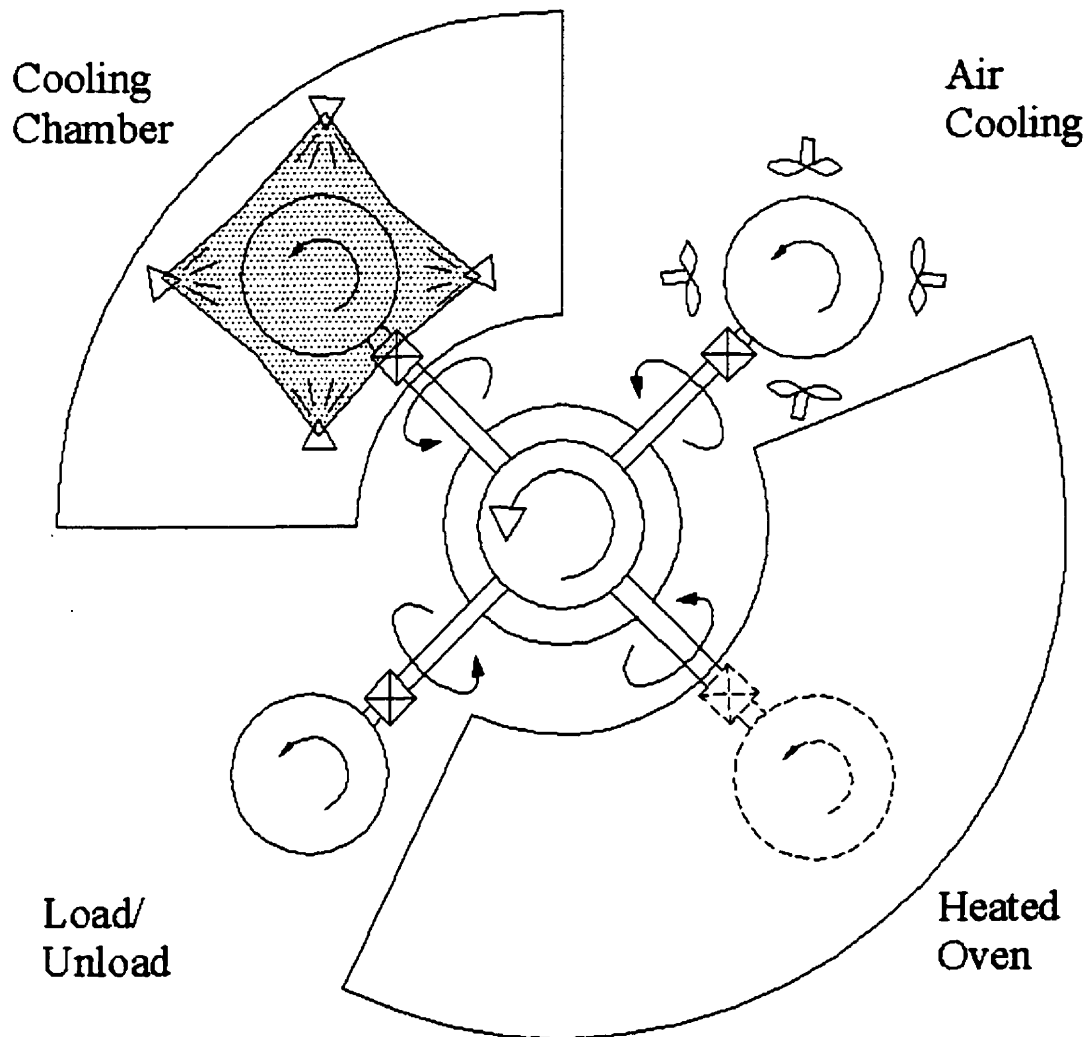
Schematic of a Box Oven Rotomolding Machine
